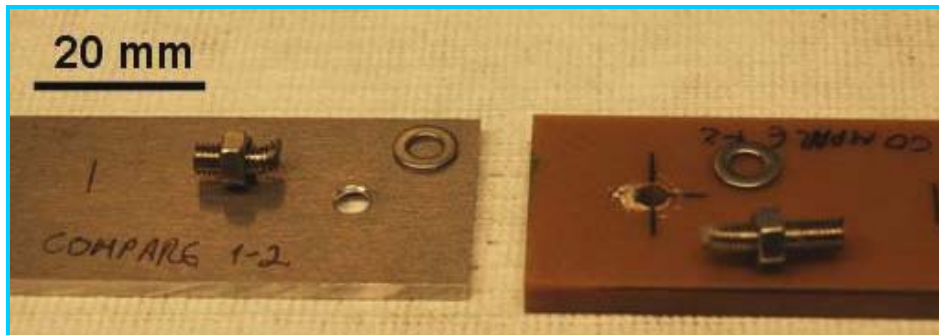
Aspects of the fractured bolted comparison specimen showing rivet shear failure mode.
